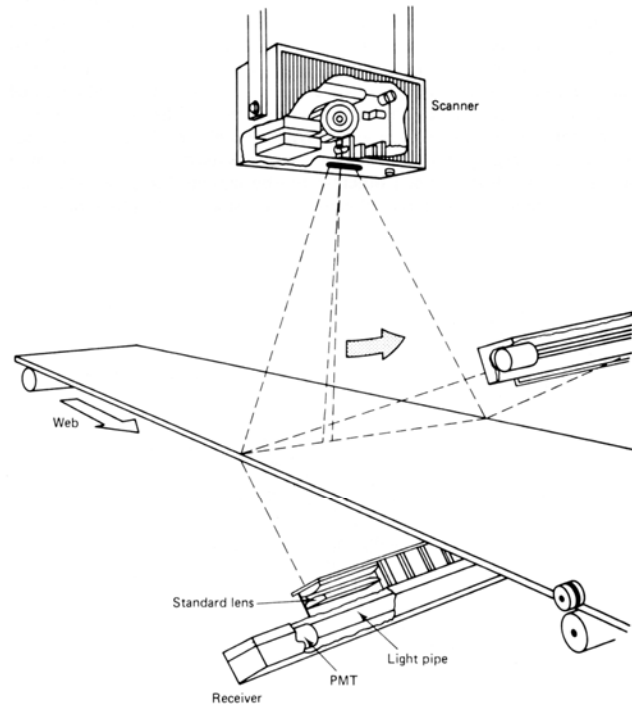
Laser scanner inspection system. (Courtesy of Intec Corp.)
